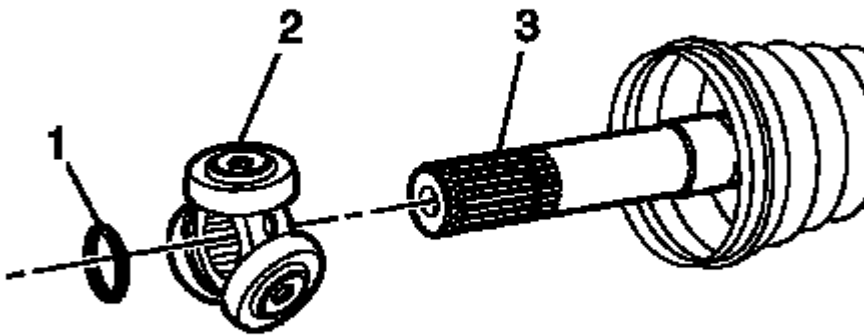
View Of Wheel Drive Shaft, Tripod Spider And Retaining Clip
